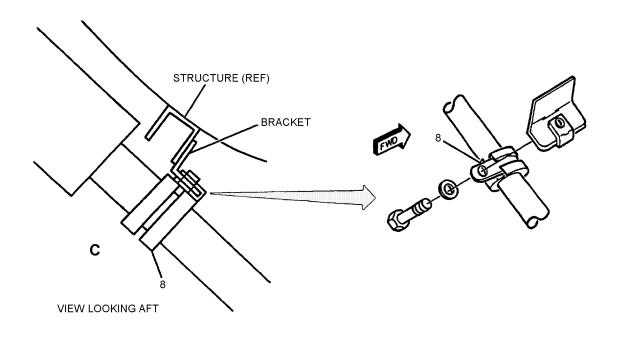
Fuel Crossfeed Tube Using Reducer (Sheet 2)
